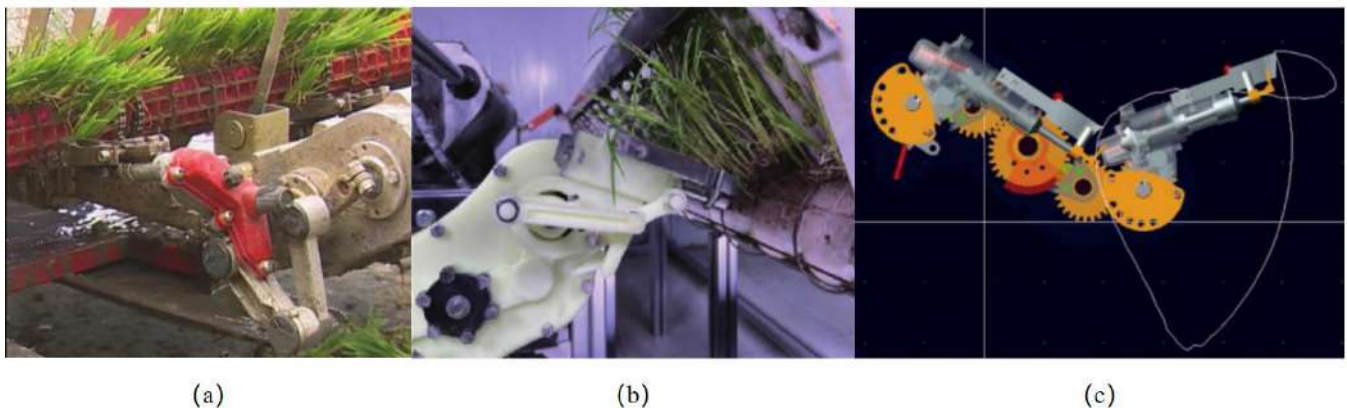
Gear-driven transplanting mechanism. (a) Elliptical Gear-Double Crank Five-Bar Transplanting Mechanisms [73]; (b) Non-circular gear-linkage combination transplanting mechanism [74]; (c) Planetary wheel system hole tray seedling transplanting mechanism [75]
